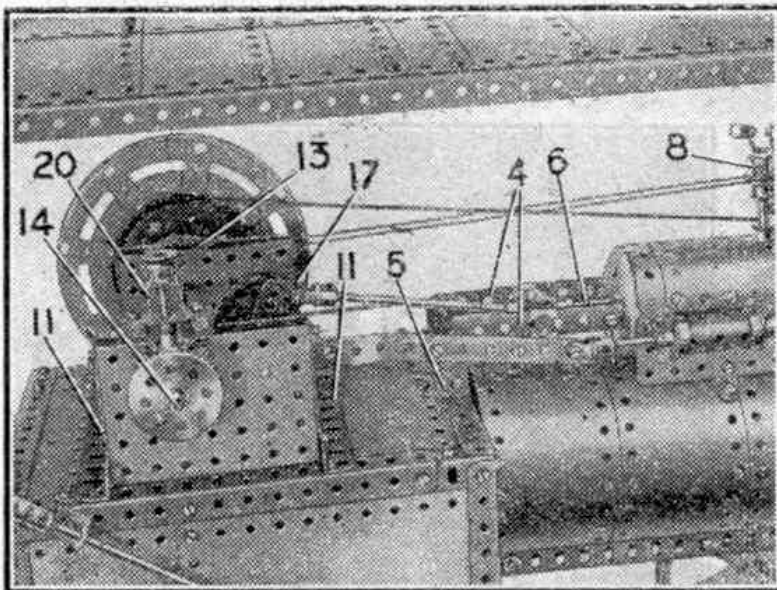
The engine, showing details of the crankshaft, slide bars, crosshead and the governor drive.
